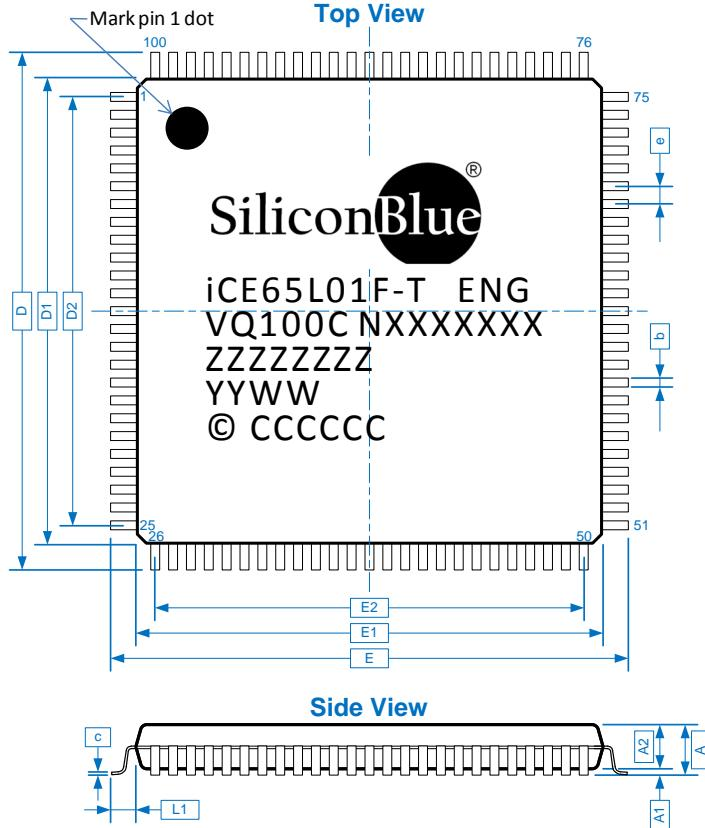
VQ100 Package Mechanical Drawing: NVCM Programmed Device Marking
